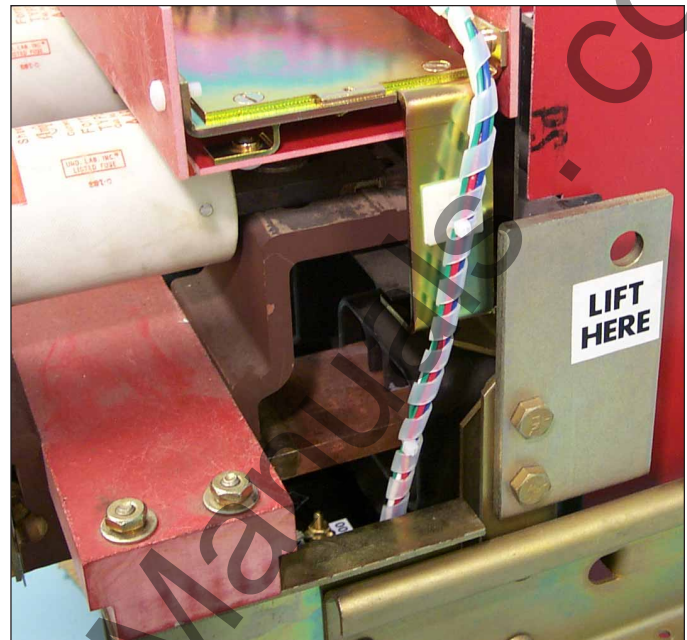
Sensor Harness Secured to the Left Aux. CT Module Mounting Bracket.
